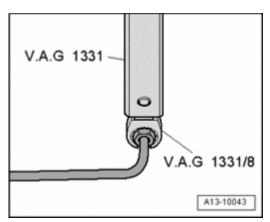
Tightening Union Nut At Fuel Rail Using Torque Wrench V.A.G 1331 With 14 Mm Open End Wrench Socket V.A.G 1331/8
